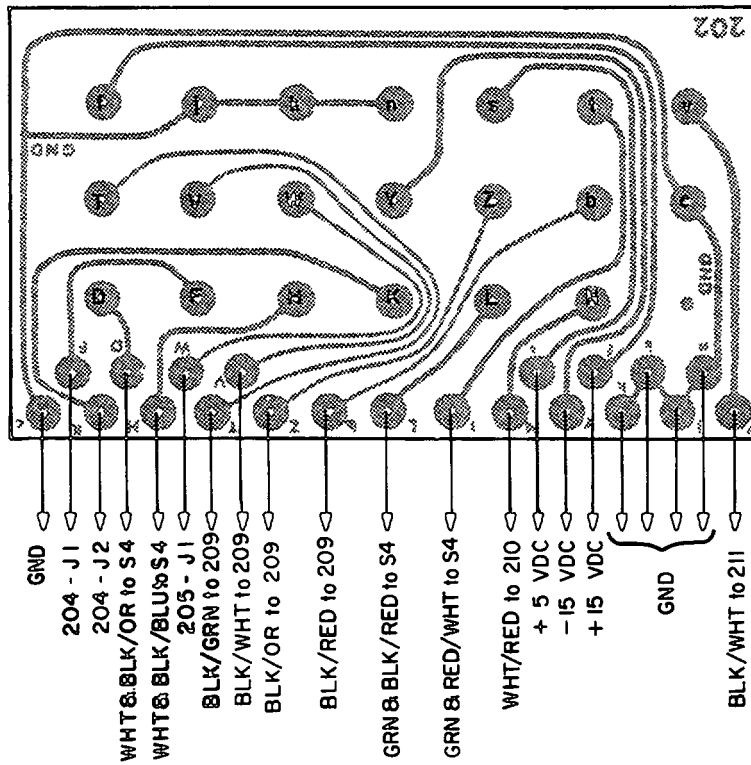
P.C. BOARD ASSEMBLY, BOARD 202, DRAWING
